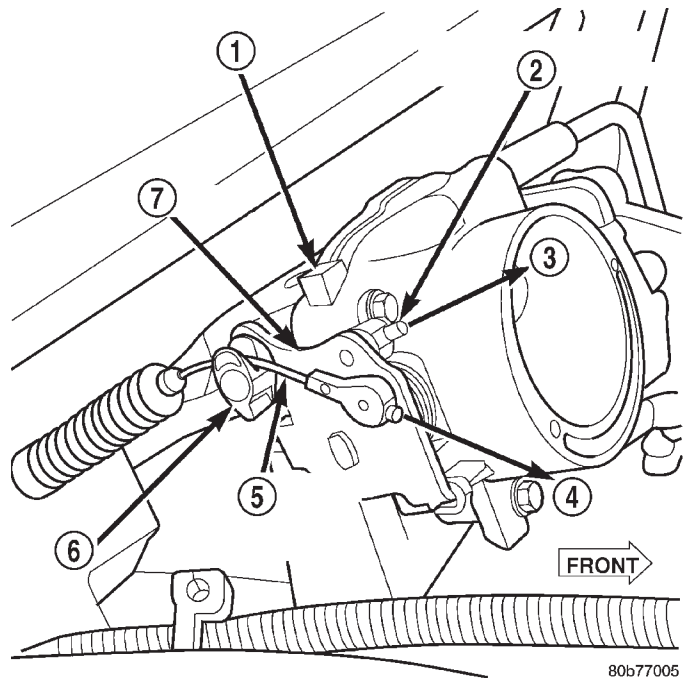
Accelerator Cable at Bell Crank—4.7L V-8 Engine
